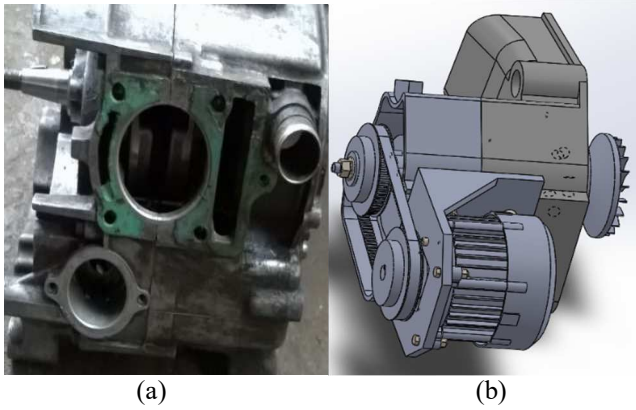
(a) Cygnus motor housing; (b) 3D view of a base design for BLDC motor on Cygnus chassis
